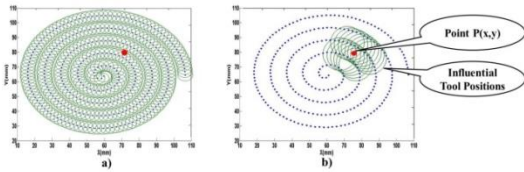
a) All tool positions over the tool path, b) distinguished influential tool positions
